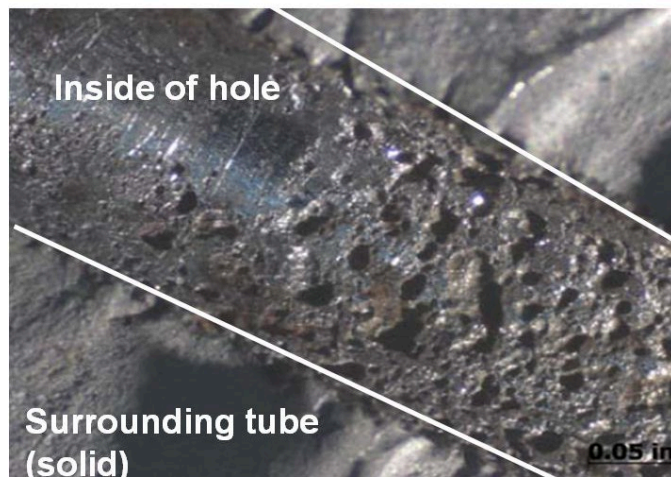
Photograph of the inside of the hole illustrating the deposited residue and corrosion.
